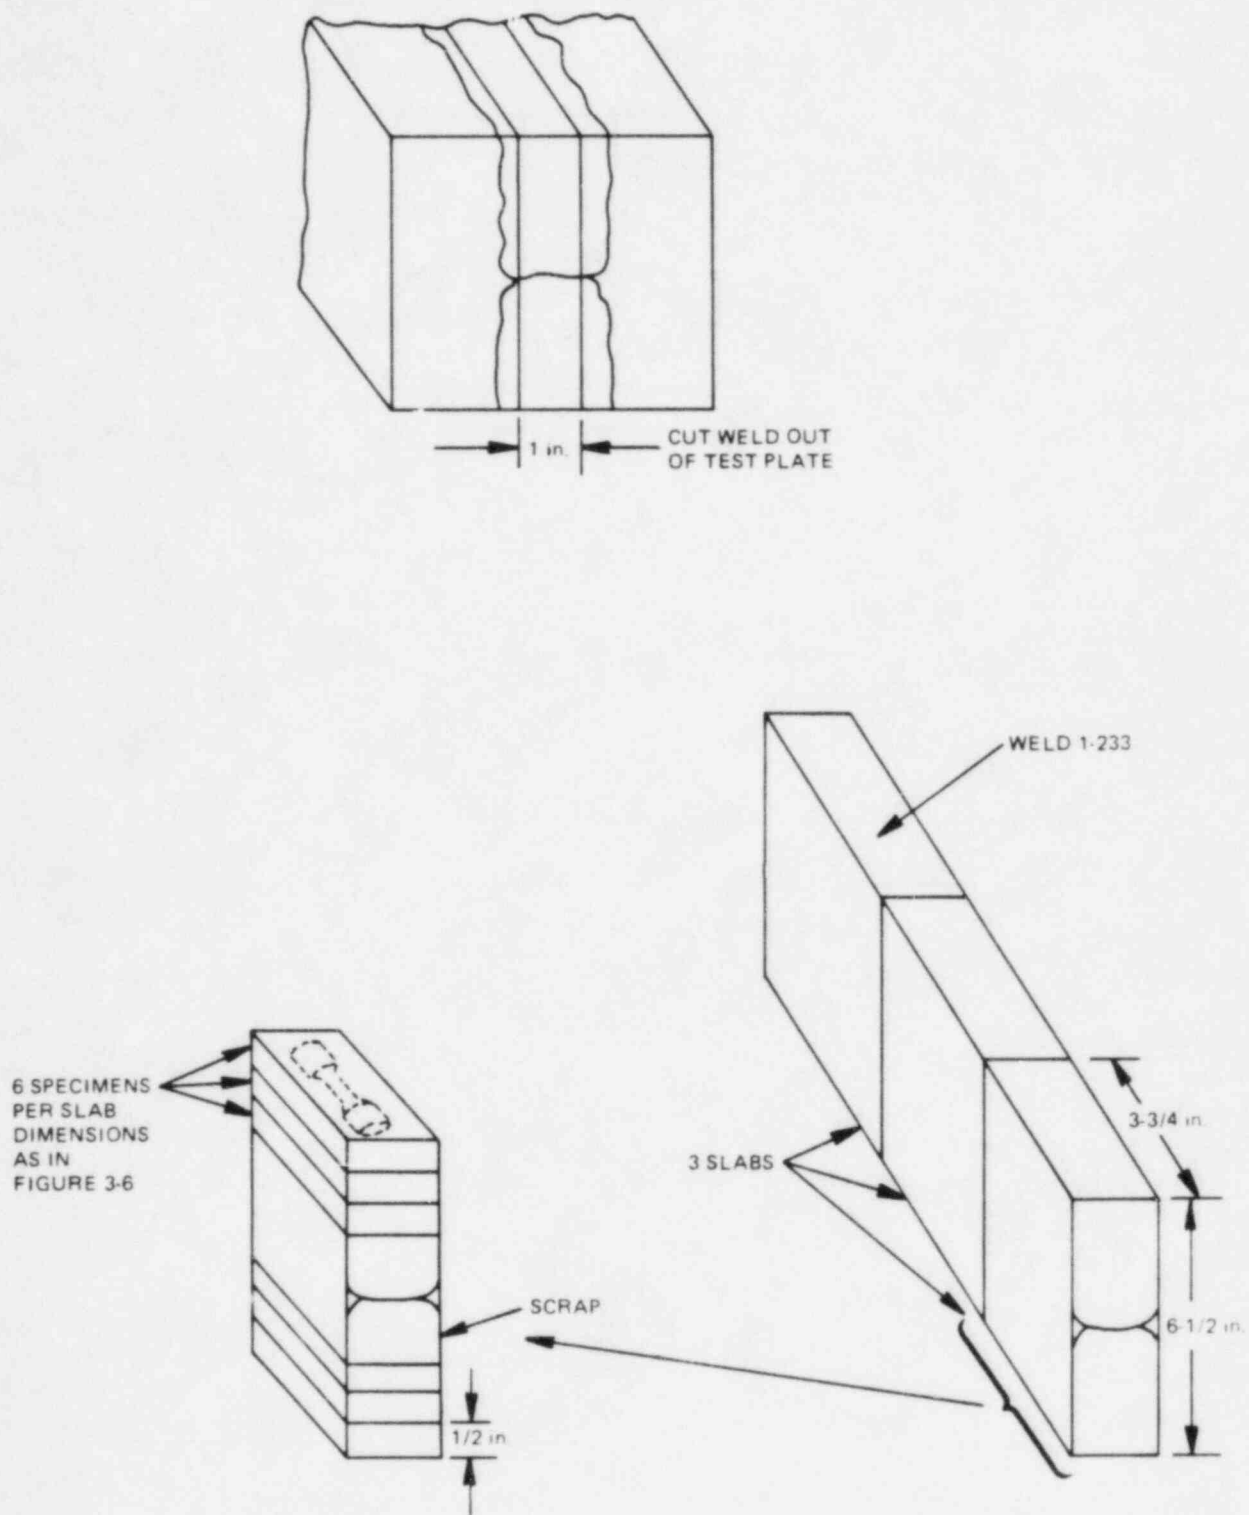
Fabrication Method for Weld Metal Tensile Specimens
